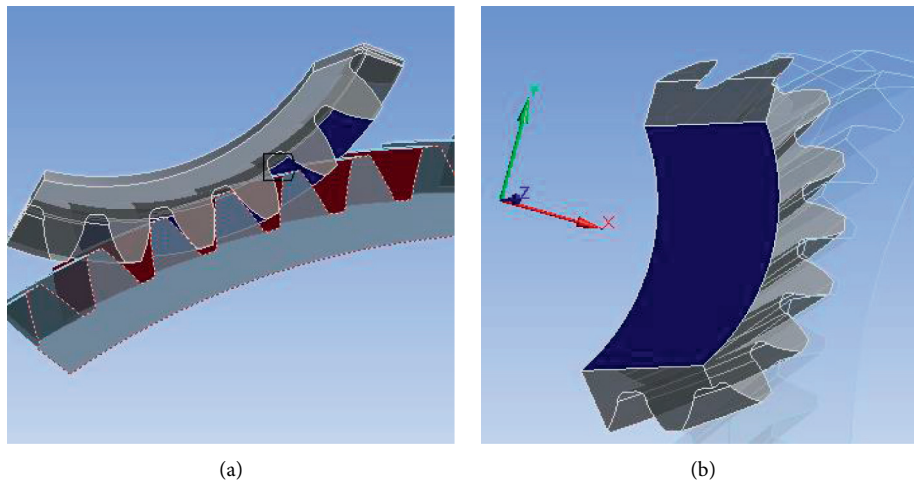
Boundary conditions of helical gears. (a) Helical gear contact pair. (b) The ground pair of helical gears.
